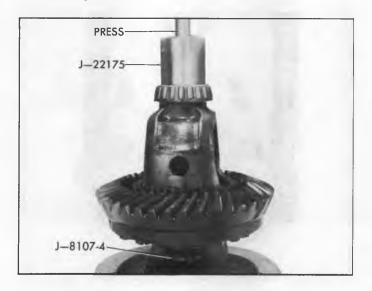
A-Differential Bearing Installation (P-Type Axle)
